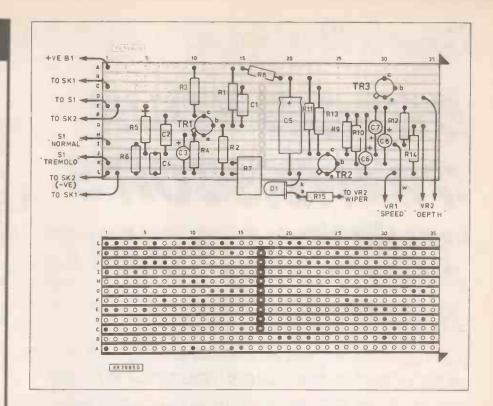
Stripboard component layout and details of breaks required in the underside copper tracks.
